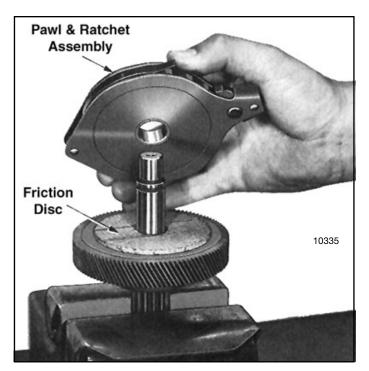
Removing Pawl and Ratchet Assembly from Load Brake Shaft
